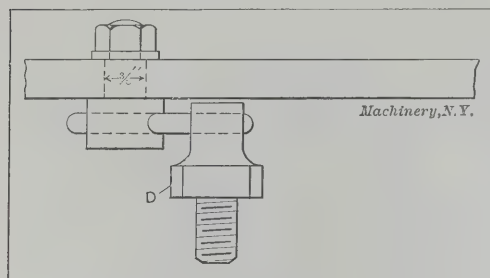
Detail of Clamping Device for Fixture shown in Fig. 5
